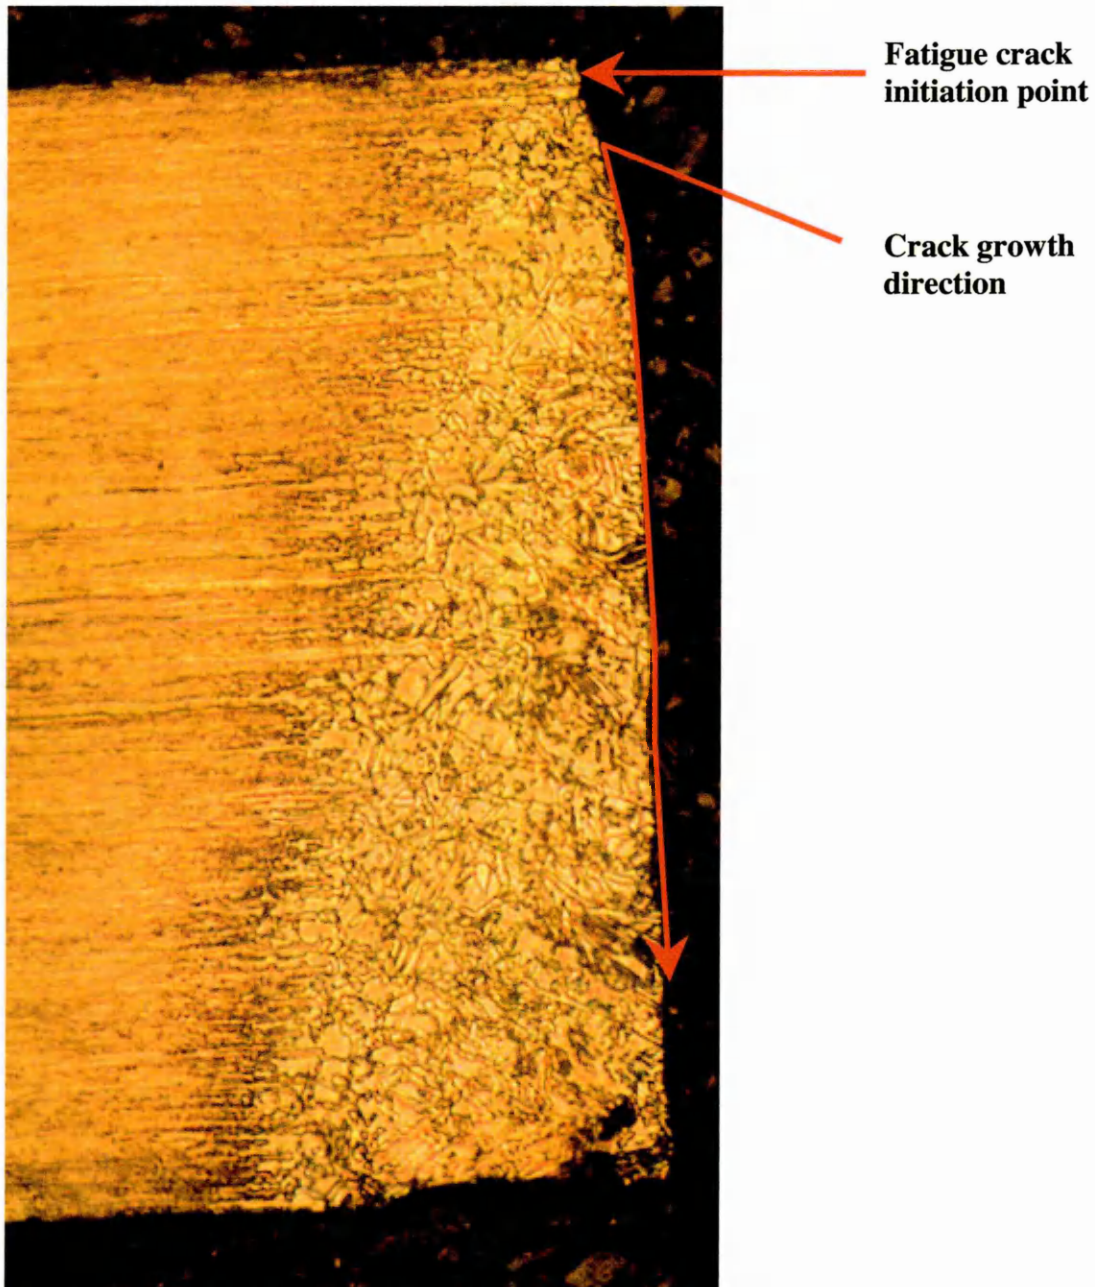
Fatigue crack propagation from the HAZ at the internal lap face into the weld bead
